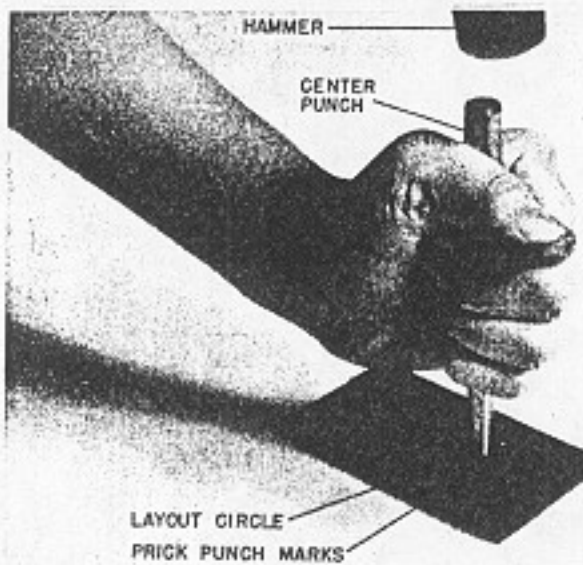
The center punch should be held perfectly straight up and down while you are center punching the location for drilling a hole.
